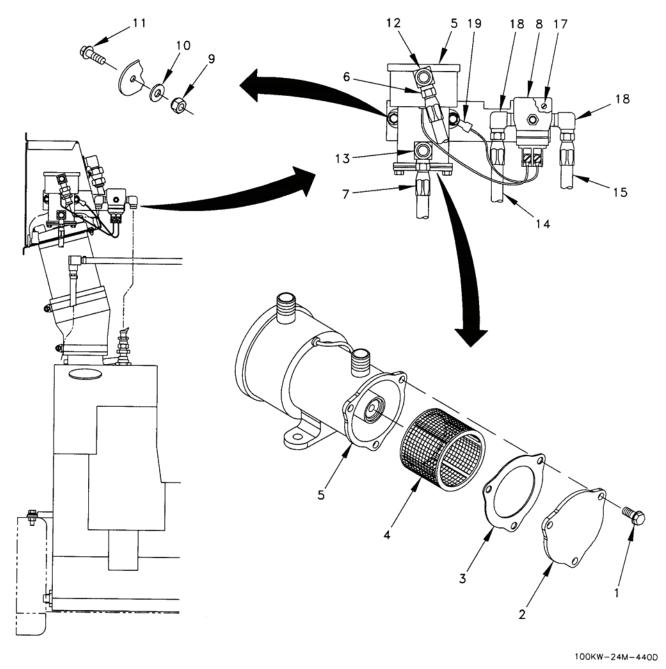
Auxiliary Fuel Pump Assembly and Solenoid Valve.
